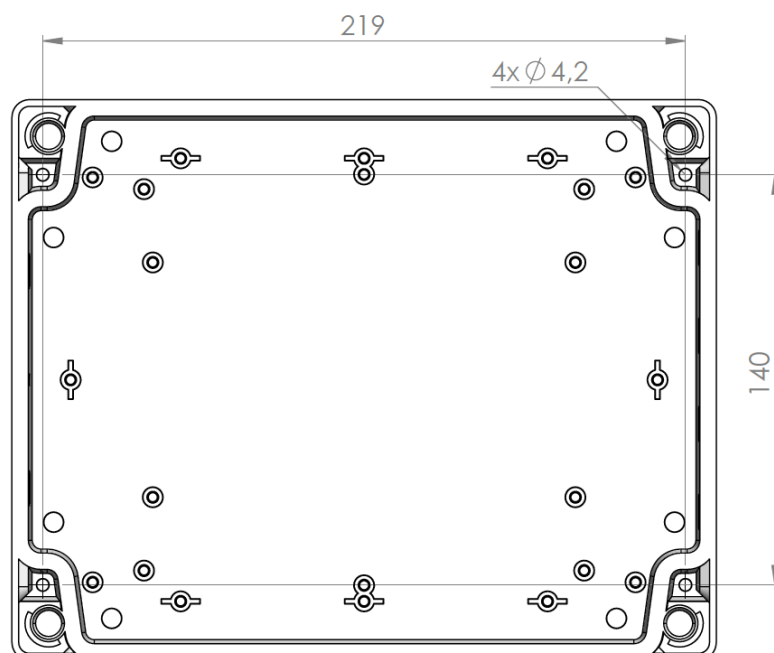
Dimensions and mounting options for the brackets of the Barrier Box
